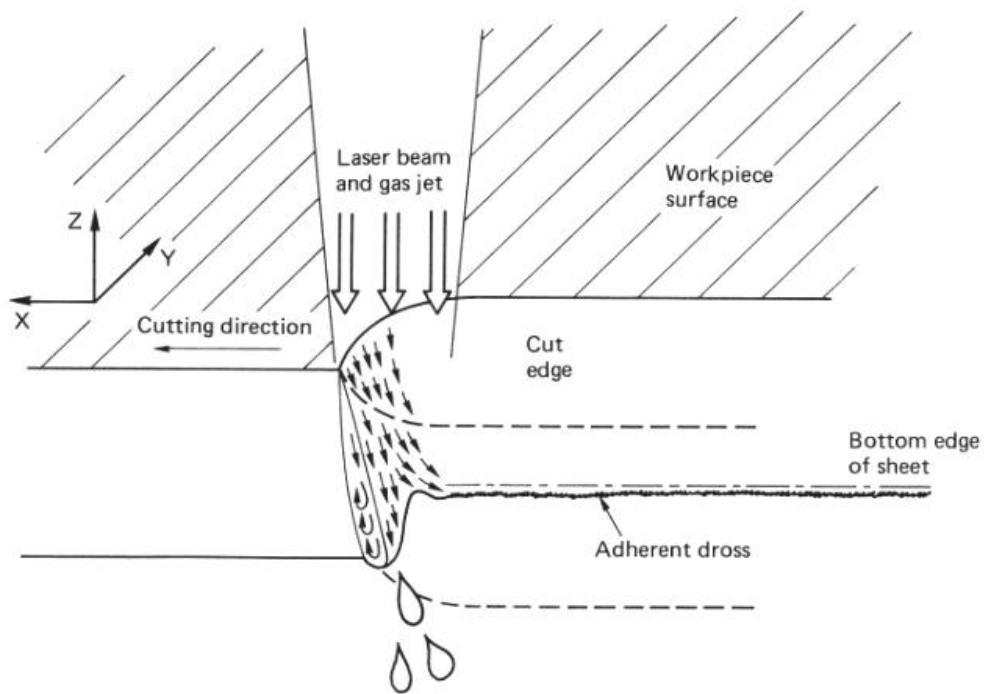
A schematic of the cut zone when laser cutting stainless steel. /25/
